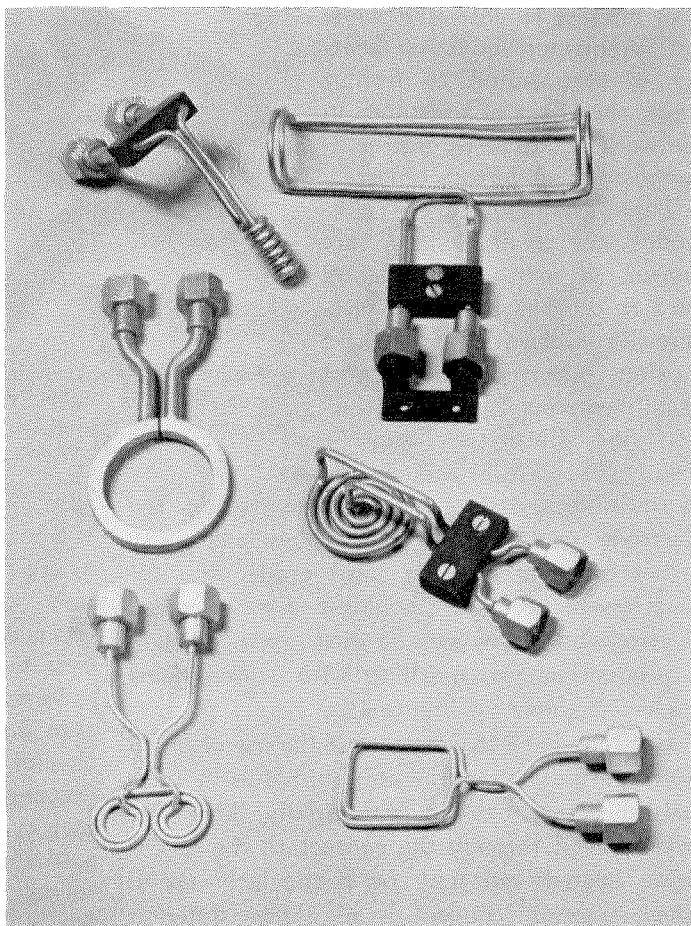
The heating inductors are shaped to place the coil near only those parts of an object in which heat is required.
